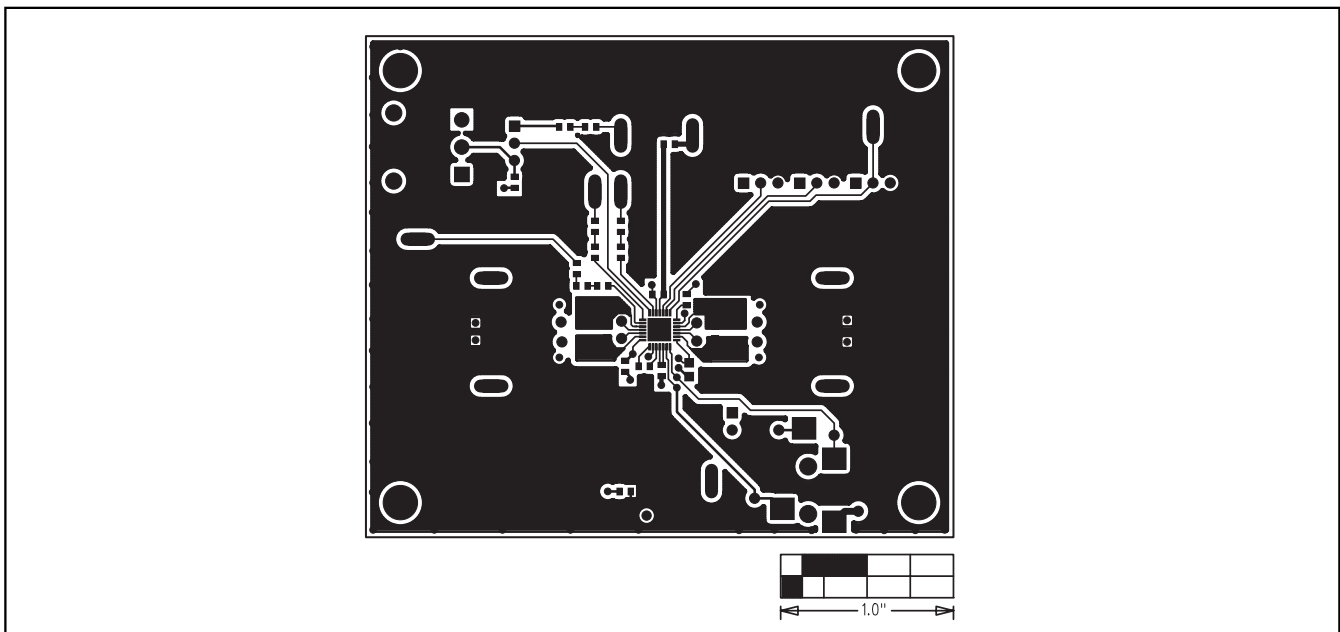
MAX9752A EV Kit PC Board Layout—Component Side
